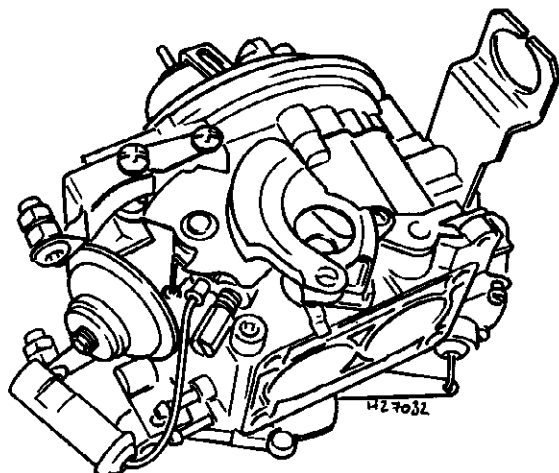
Weber TLDE carburettor (Sec 1)
